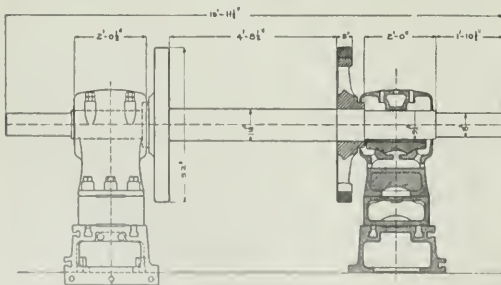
One Pair of Supporting Wheels, with Axle, Bearings and Bed Plate.
